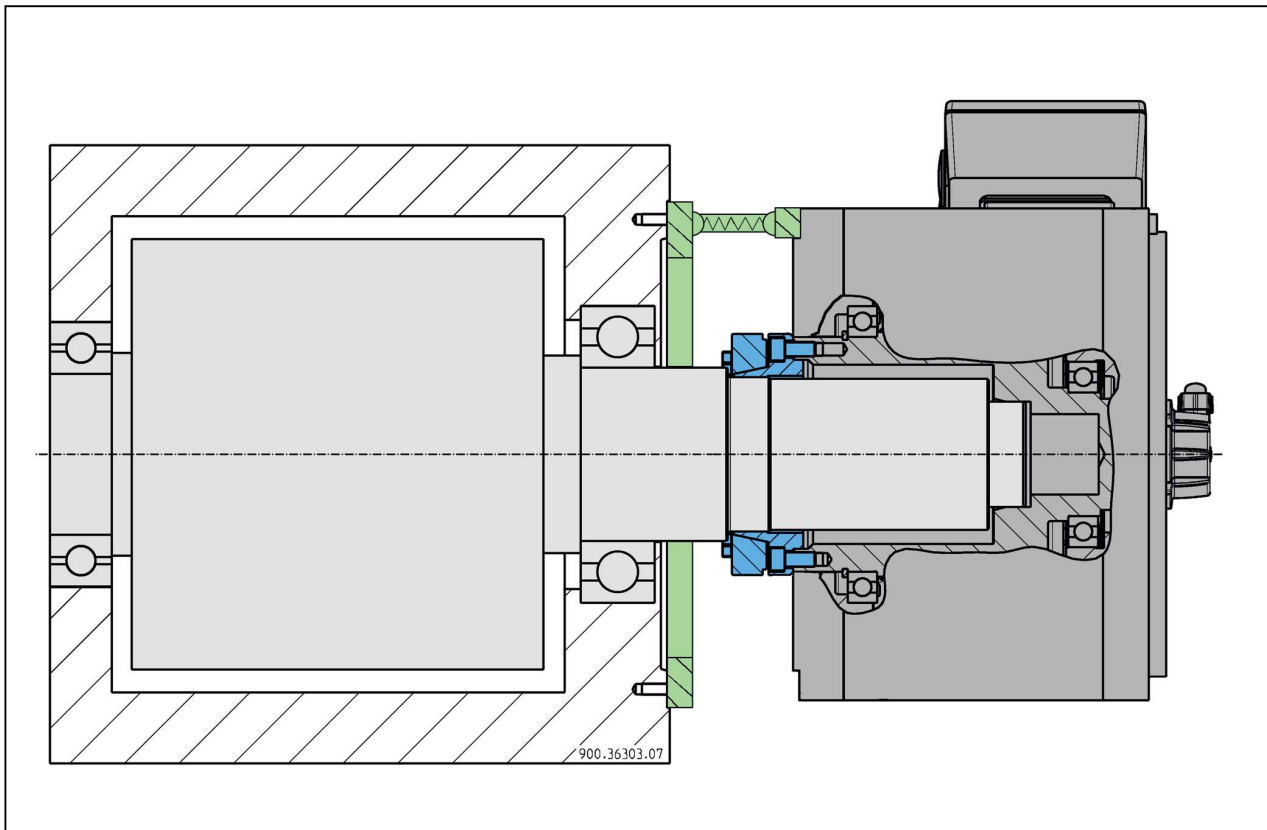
De-coupling the stator from the machine base using a torque arm (schematic representation)
